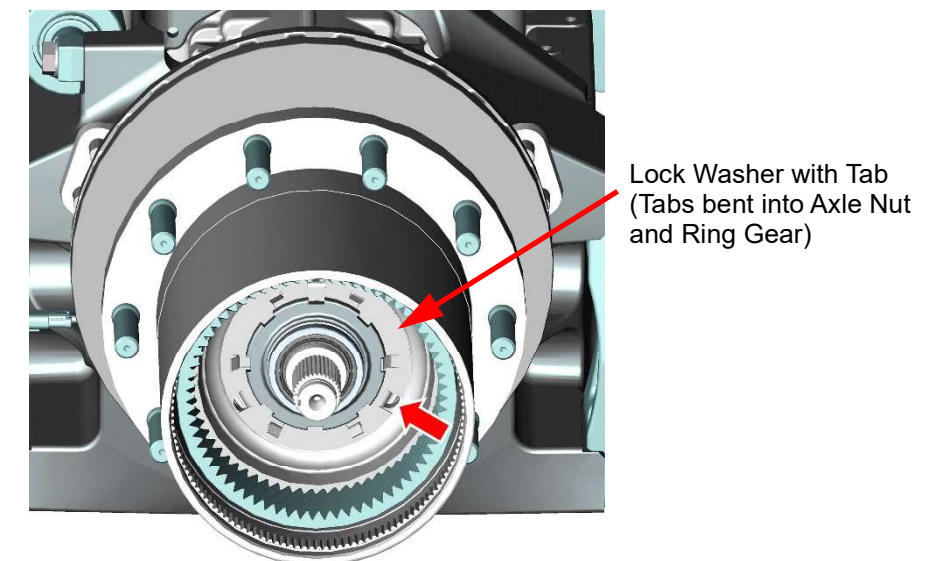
Straightening Tab on Axle Nut Lock Washer
